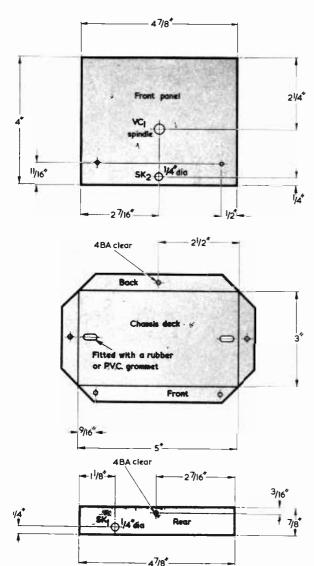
Dimensions of the front panel, the chassis deck and the chassis rear
